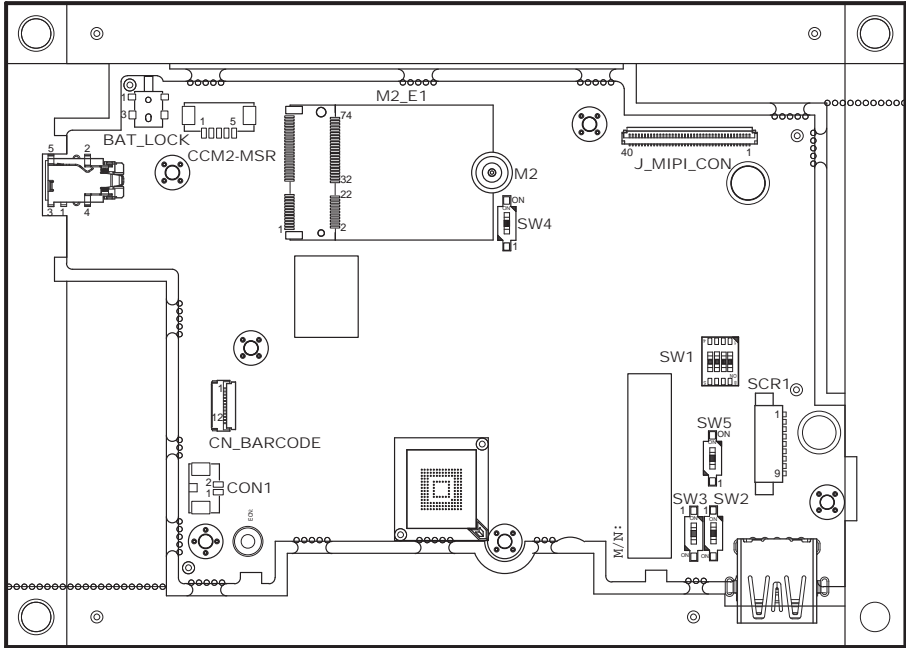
MB-5102 Main Board Component Locations (Bottom View)
